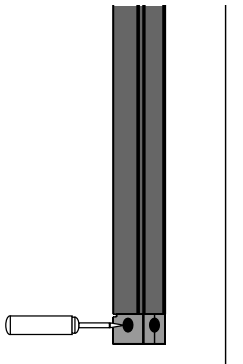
Mounting clips (for top and bottom side mounting holes [7mm, 1,995mm])
